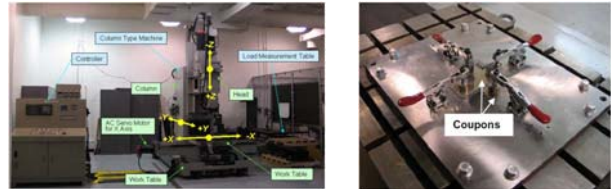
CNC controlled 3-D linear FSW system “HitSpin type GR3DC5T” and welding jig with a coupon in a cross-tension configuration.
